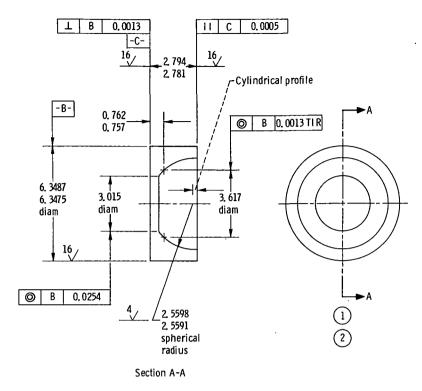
Control drum spherical bearing 128C8072, Cermet composition: set, 1 HfN-10W; set 2, HfC-8Mo02NbC. (All dimensions are in cm.)
